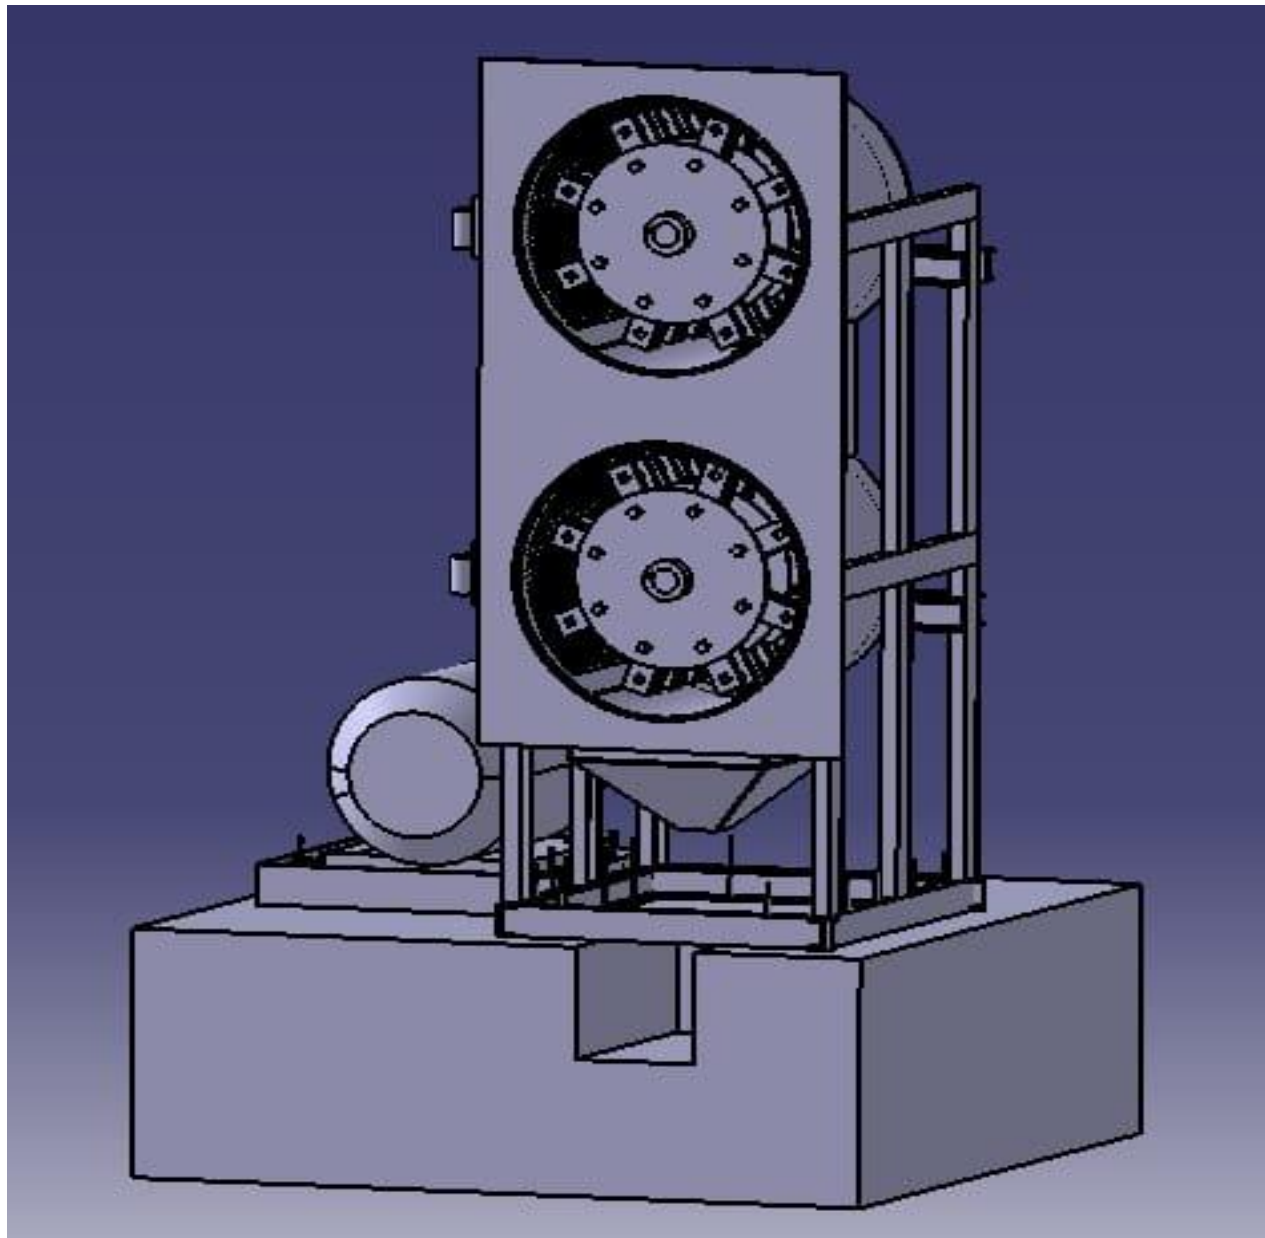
CAD Model of 2 Chamber 3 stage Pulverizer Machine.
